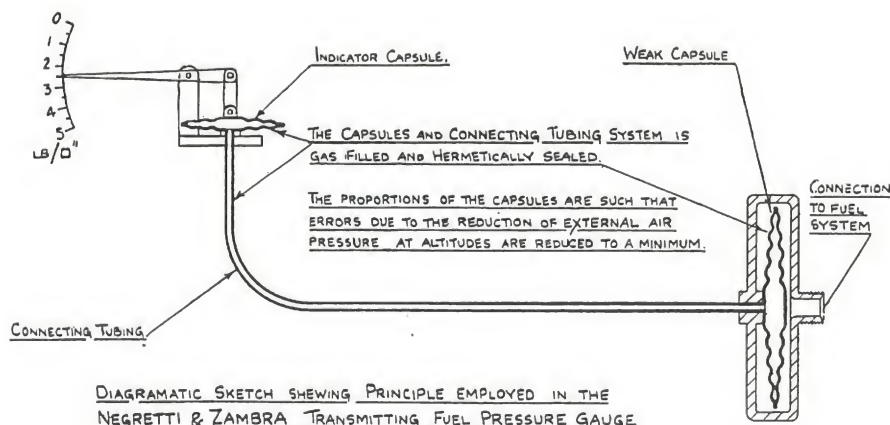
C MECHANISM OF FUEL PRESSURE GAUGE
